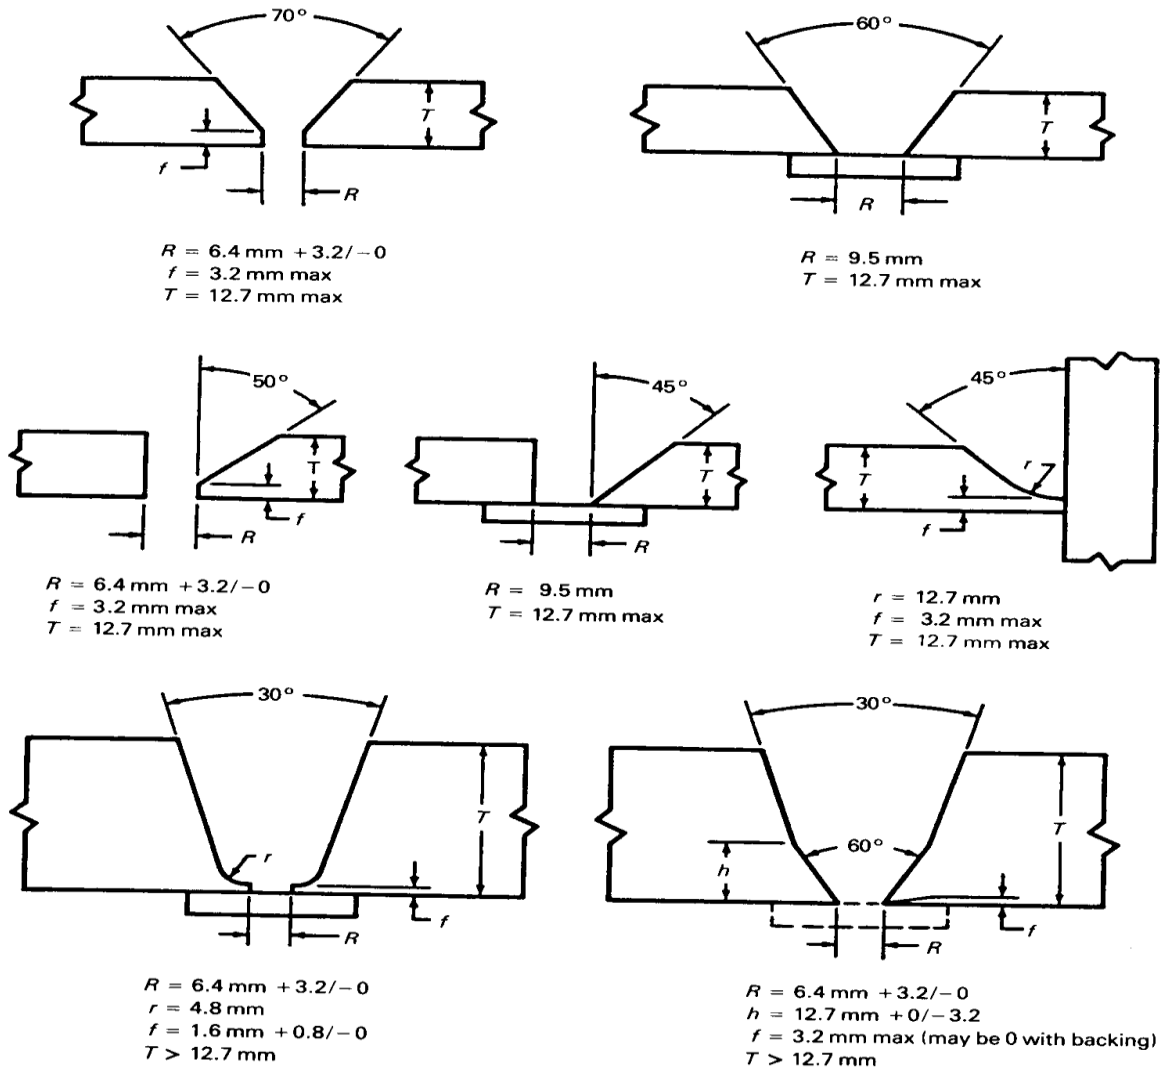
Recommended joint preparation for welds using single U or V grooves. Source: Ref 1
